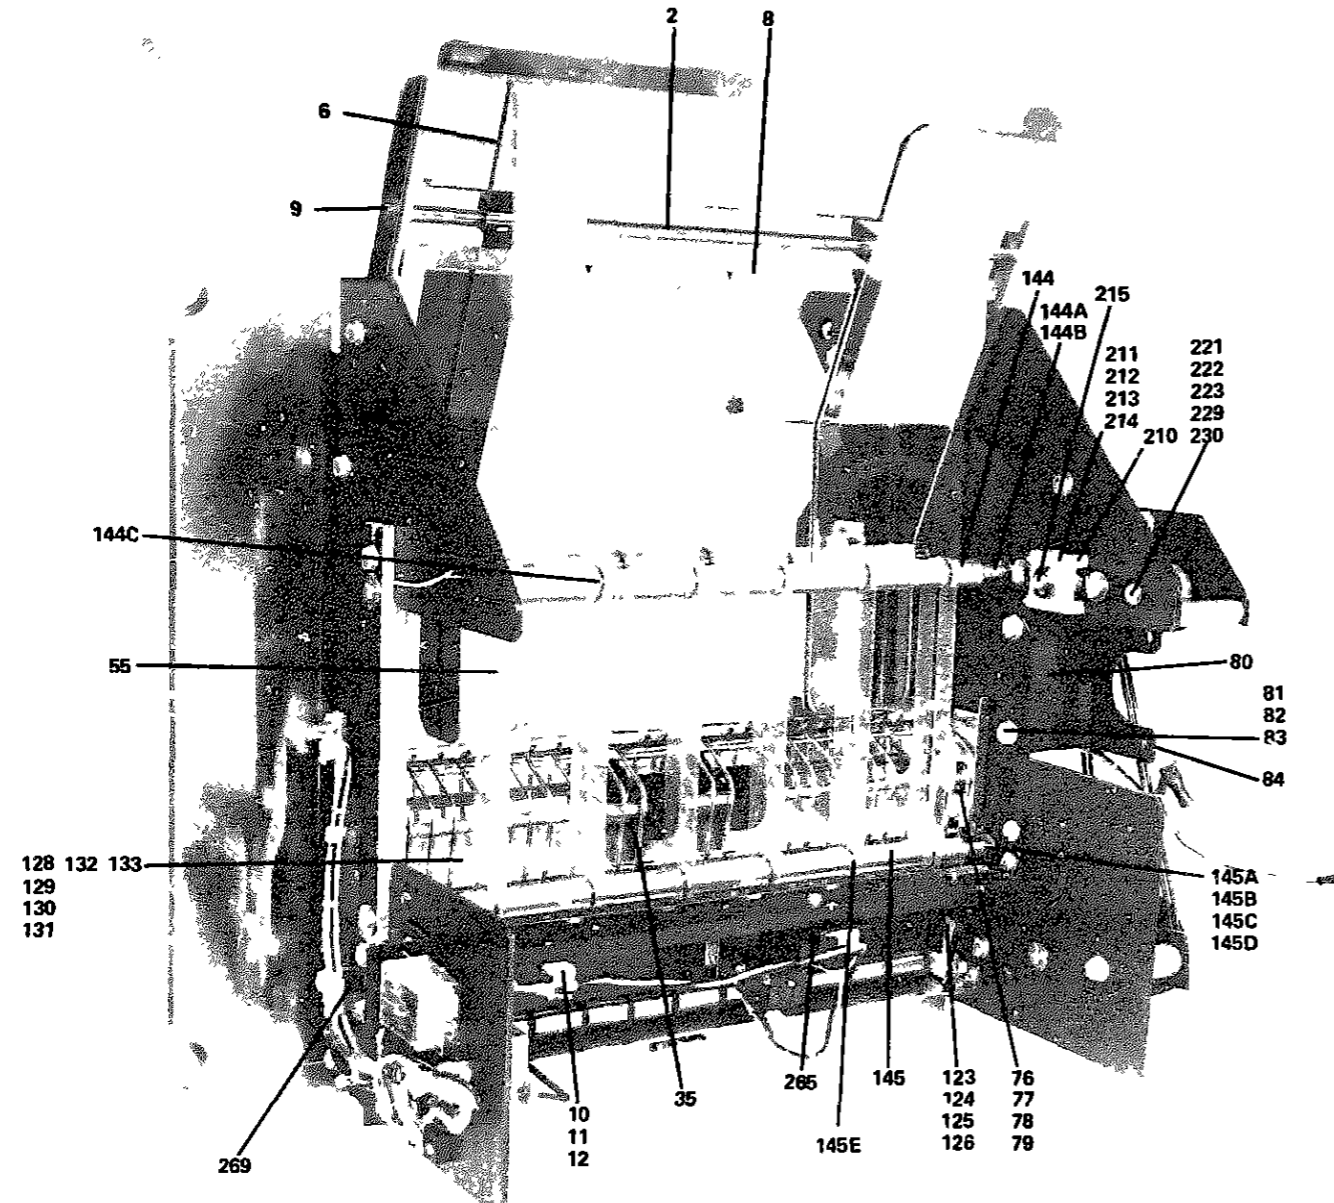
PAGE FEEDER VACUUM ASSEMBLY REMOVED 1A5 (SHEET 5 OF 11)
